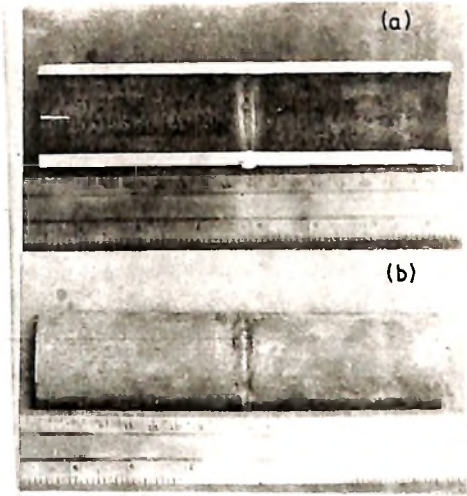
Typical appearance of the (a) TIG root pass and (b) MMA weld.
